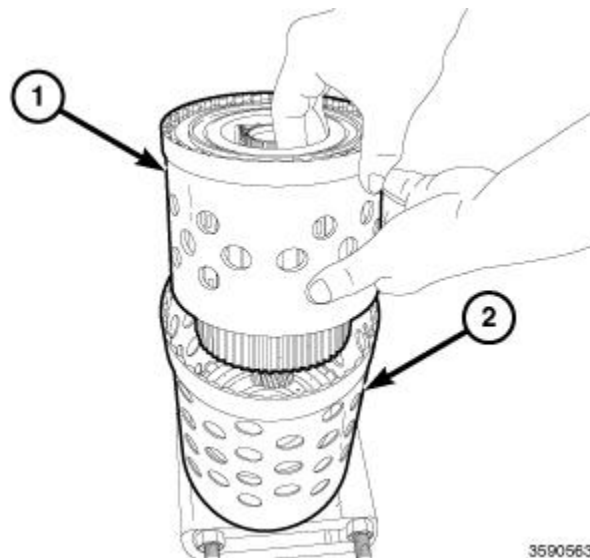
D-Clutch Drum & P4 Annulus Drum
